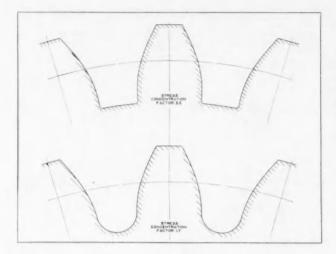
Stress-concentration factors for standard gear-tooth form and full-fillet gear-tooth form
